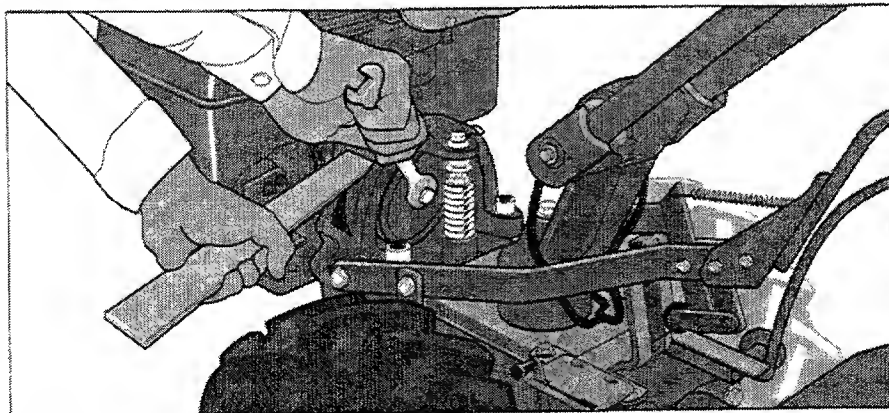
Immobilize the pulley with a wood wedge, then loosen the bolt so you can remove the rubber reverse disc. (The disc may need to be pried away from the pulley.)
